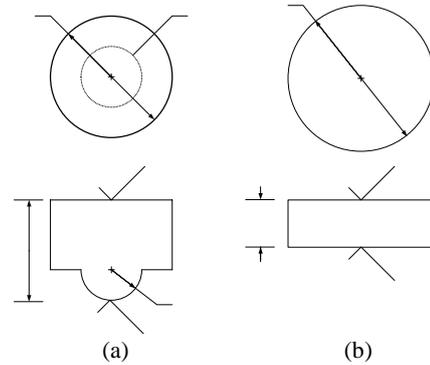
Ball-on-disk type wear specimens; (a) upper and (b) lower specimens.
